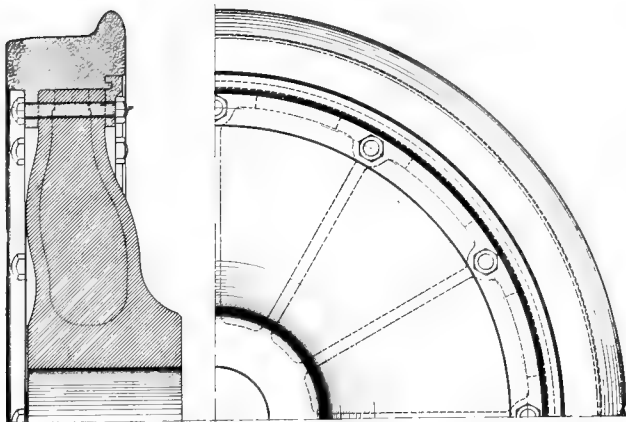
Allen No. 11 Coach Wheel. Cast Iron Double Plate Center, Having Internal Spokes, with Tire Secured by Shrinkage, Bolts and Mansell Retaining Rings.
